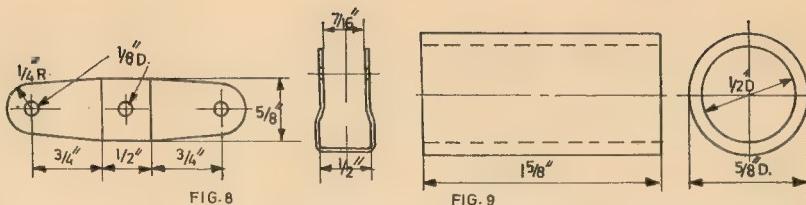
Horizontal pivot fork, showing dimensions when bent. Fig. 9: The housing for the vertical pivot bearing
